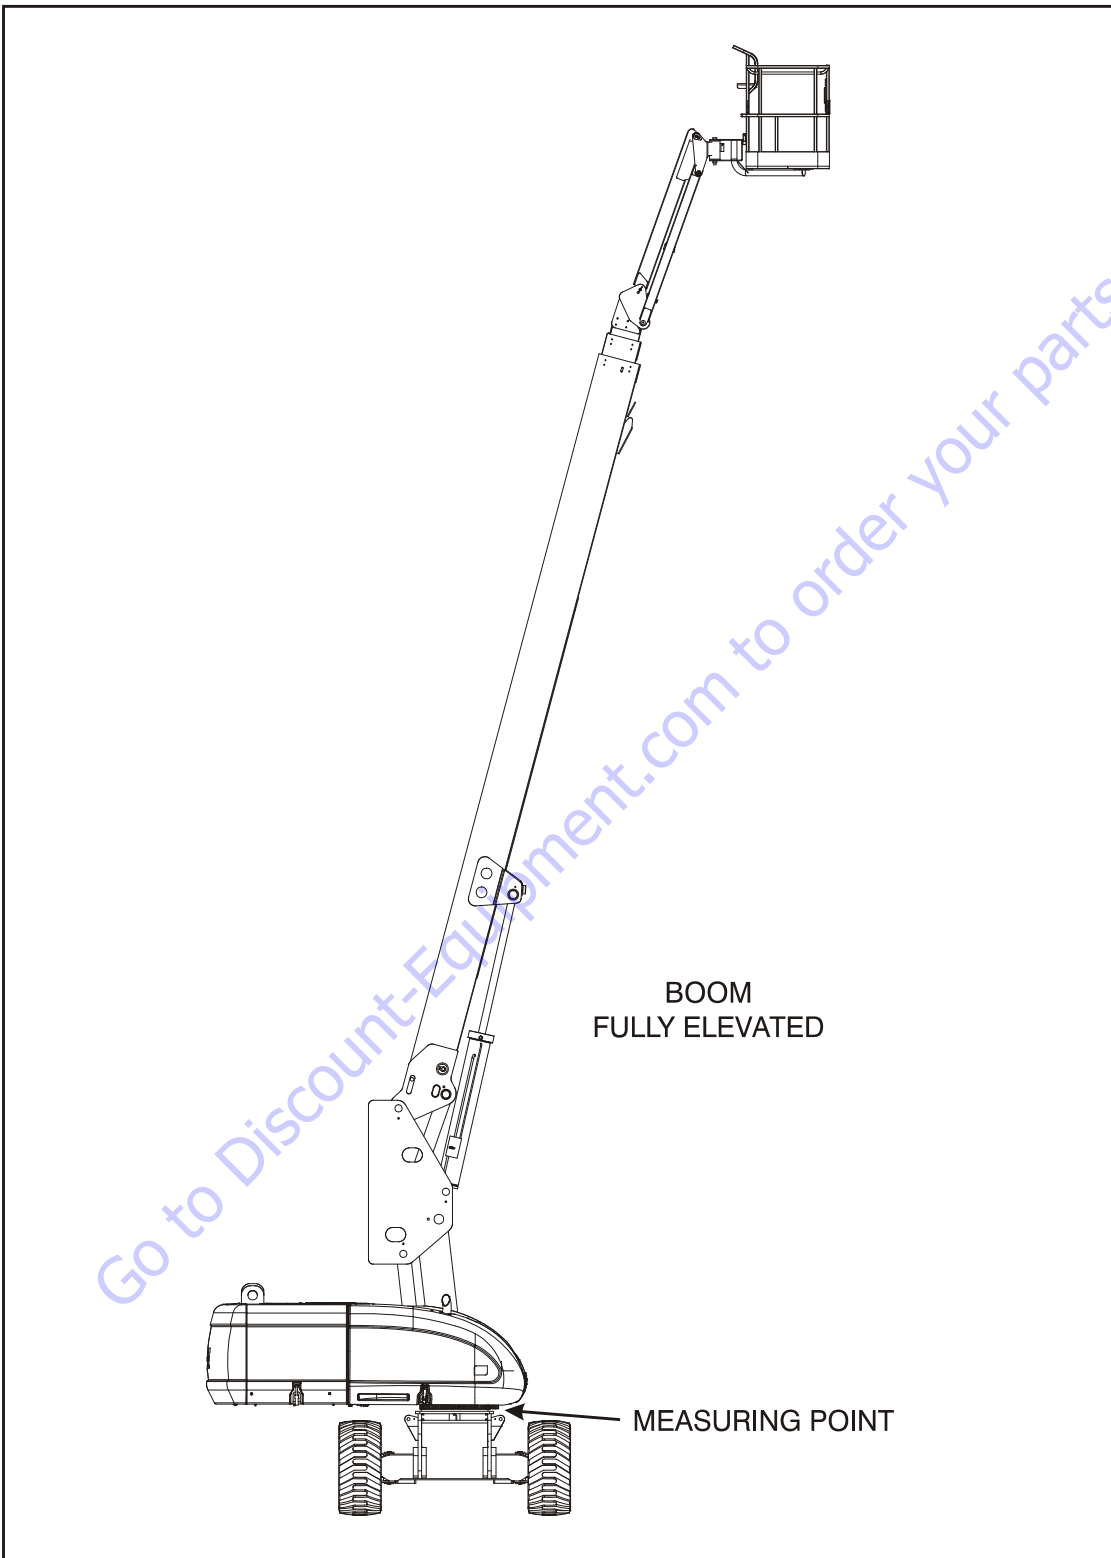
Swing Bearing Tolerance Boom Placement (Sheet 1 of 2)
